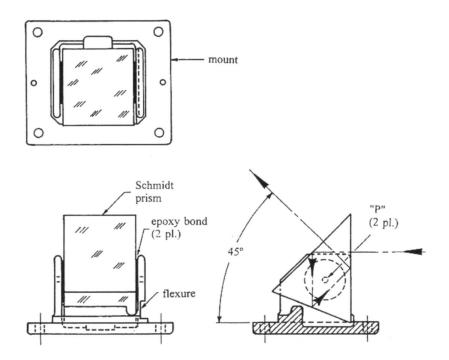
A Schmidt prism bonded on both sides to a U-shaped mount. (From Willey.¹⁴)
